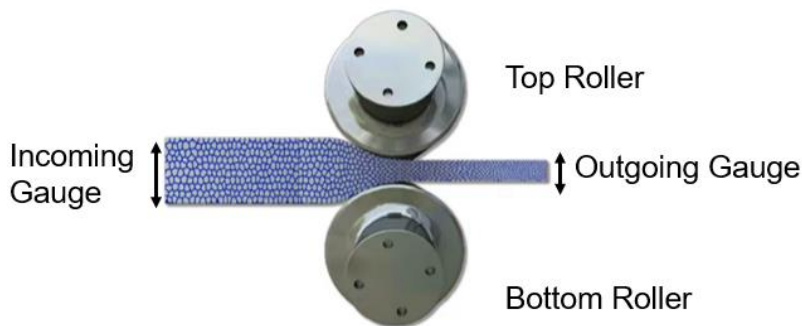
COLD MILL ROLLING ALUMINUM INTO THE DESIRED GAUGE (MALLESHAM)
